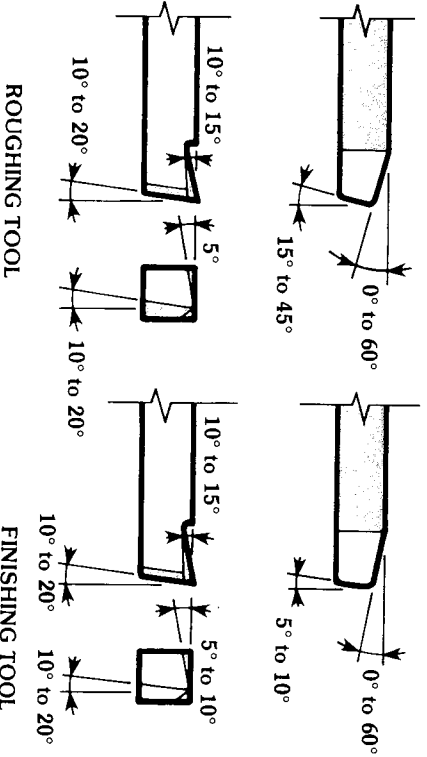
Typical turning and boring tool geometry for magnesium.
